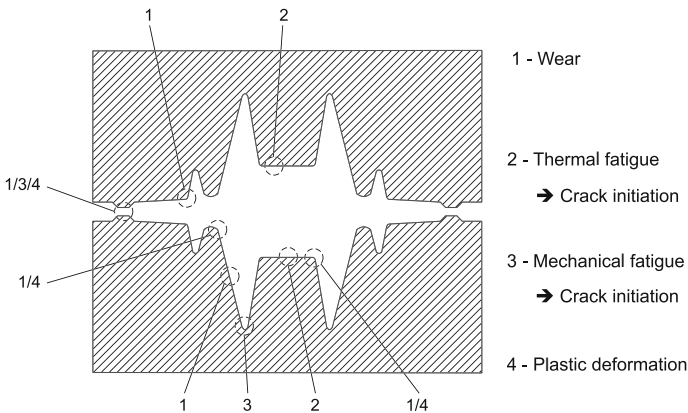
Types of forging die damage [LANG90b]
